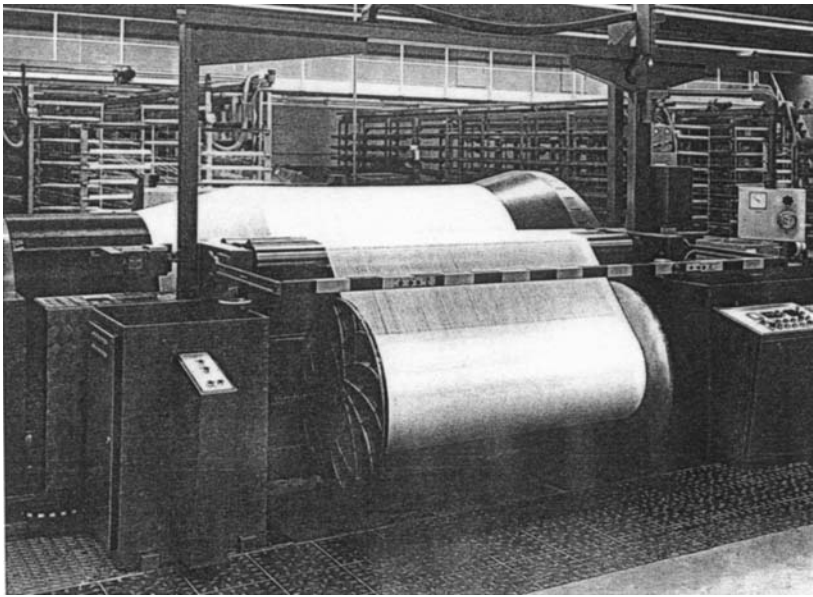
Sectional warping and beaming machine. (Courtesy of Sucker-Muller-Hacoba GmbH & Co., Germany.)
